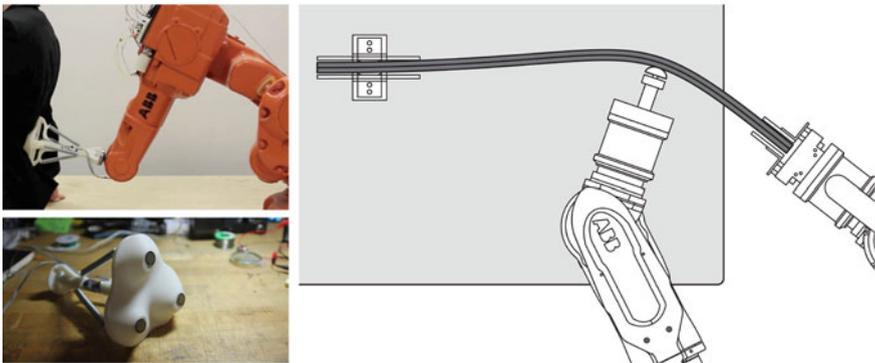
Custom forming tool gauges pressure feedback from stressed wood
